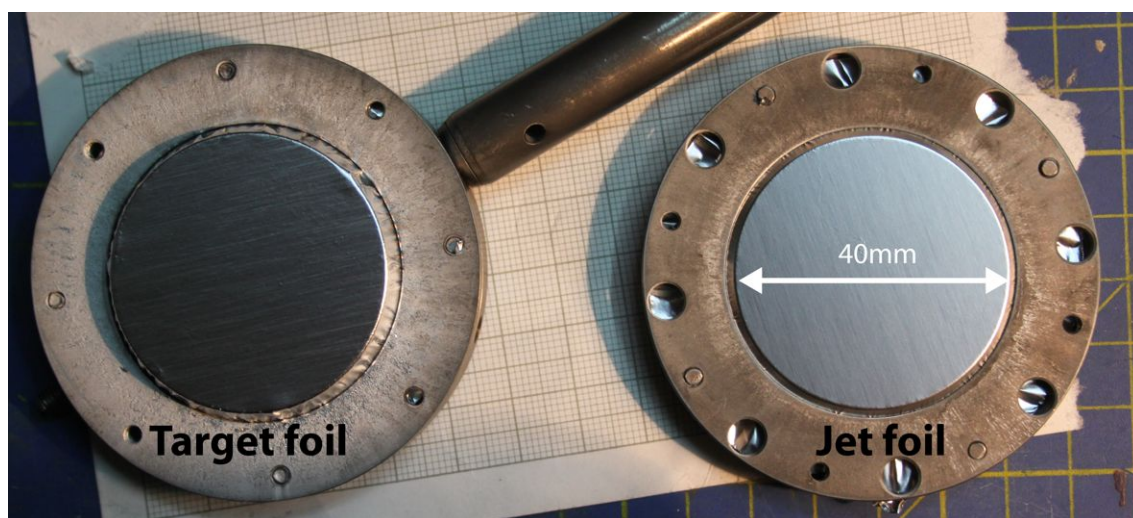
The assembled target and jet foils before placement in the discharge chamber.
